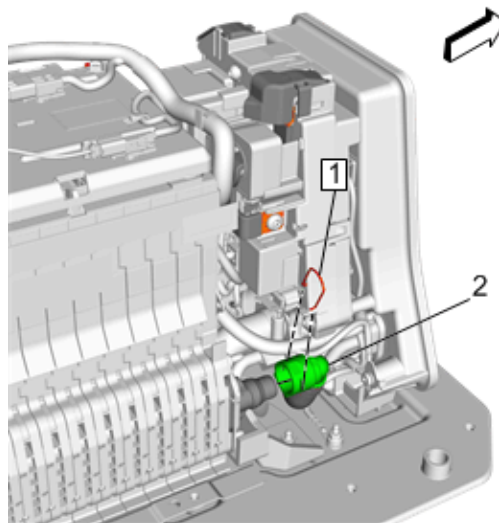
High Voltage Battery Cooling Manifold Inlet Hose And Retainer
